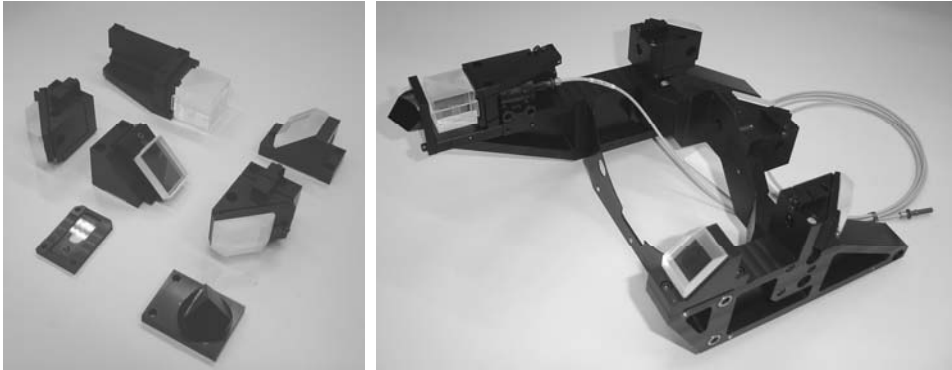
Realized Z-stage optics mounts and assembly (upside down)
